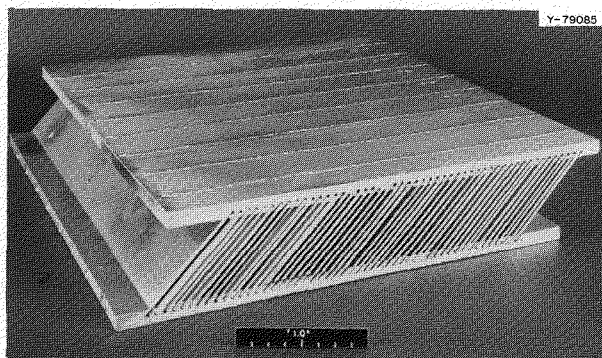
Flat-Plate Test Sample Dummy Fuel Plates Electron-Beam Welded to Type 6061 Aluminum. Note poor fit-up.
